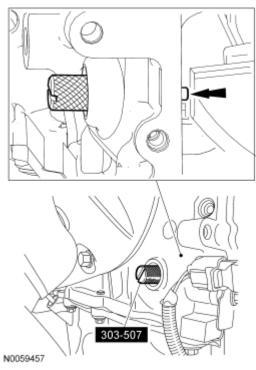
Identifying Special Tool (303-507) Courtesy of FORD MOTOR CO.
